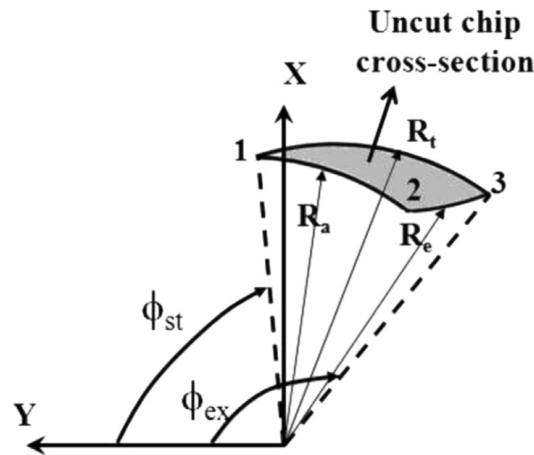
Schematic coaxial uncut chip geometry (Karaguzel et al., 2015b).
